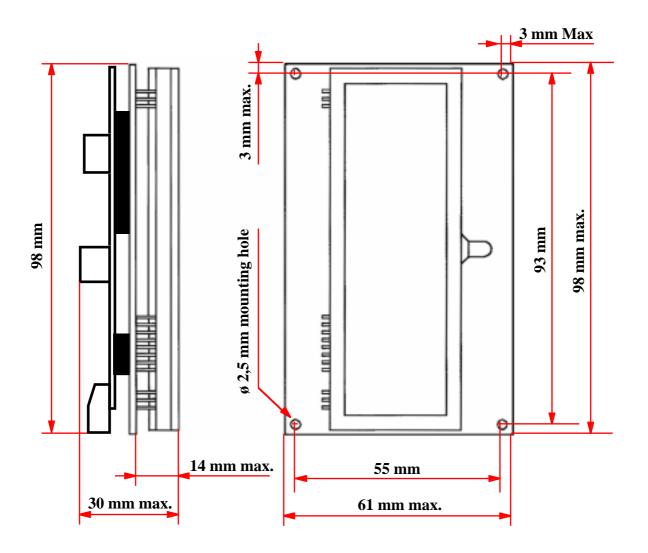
QTP 03-C4, F4 DIMENSIONS
